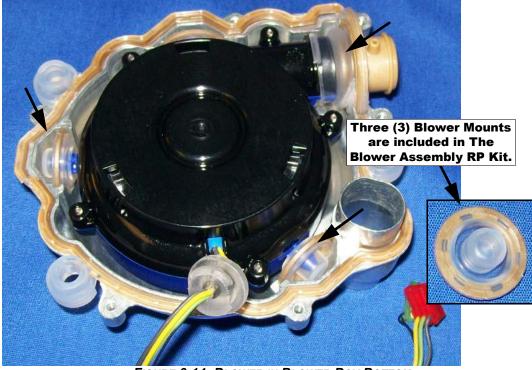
BLOWER IN BLOWER BOX BOTTOM
